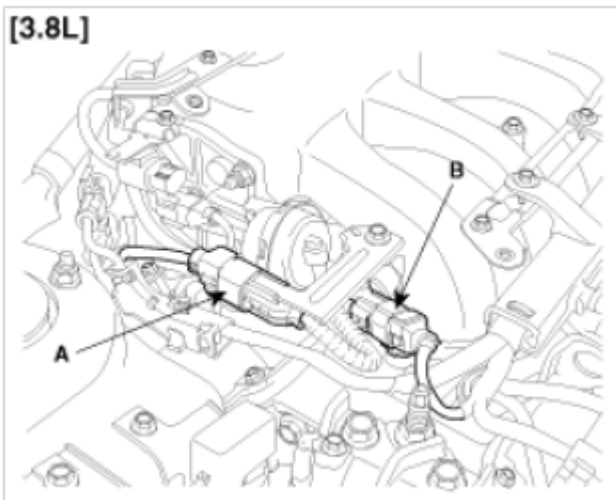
Identifying OCV Connector And Knock Sensor Connector, LH Front Oxygen Sensor Connector, Alternator Connector And Air Compressor Connector
